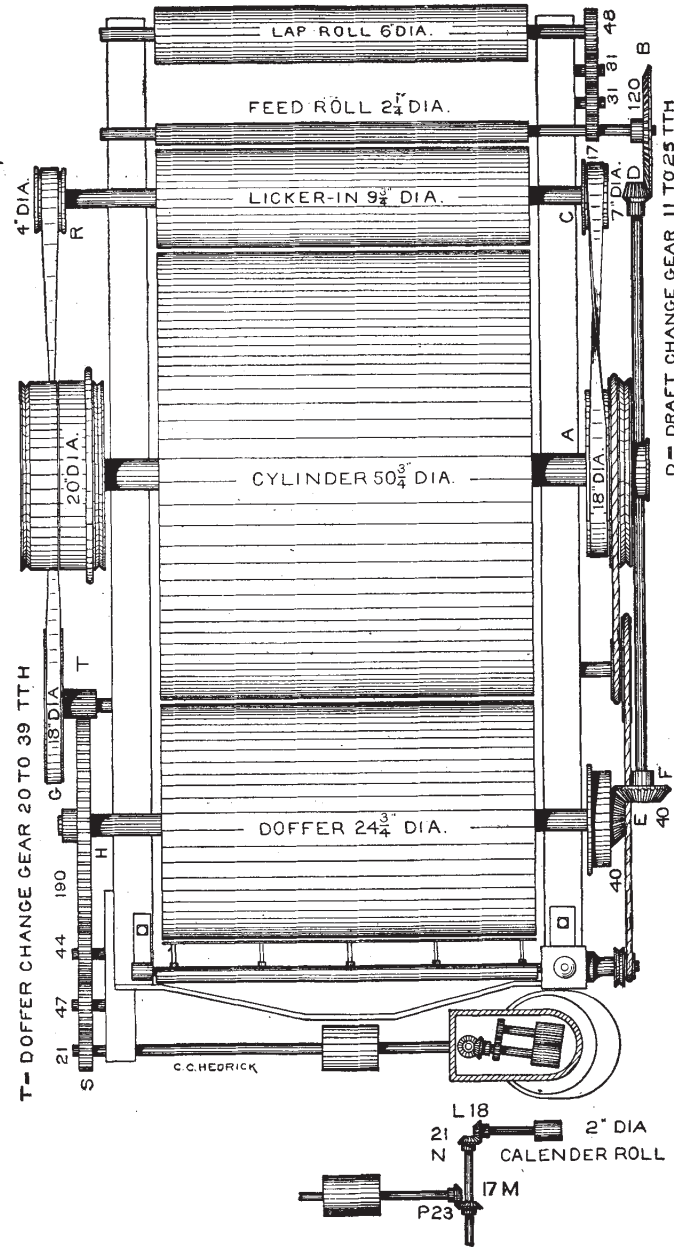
Diagram of Gearing. Pettee Machine Works Revolving Flat Card.
